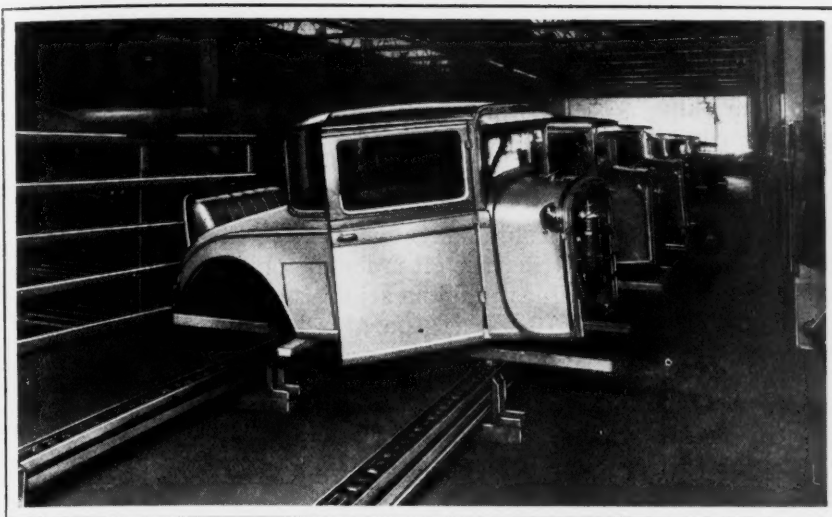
Bodies on a Conveyor Line on which They are Fitted Completely Before being Mounted on the Chassis
